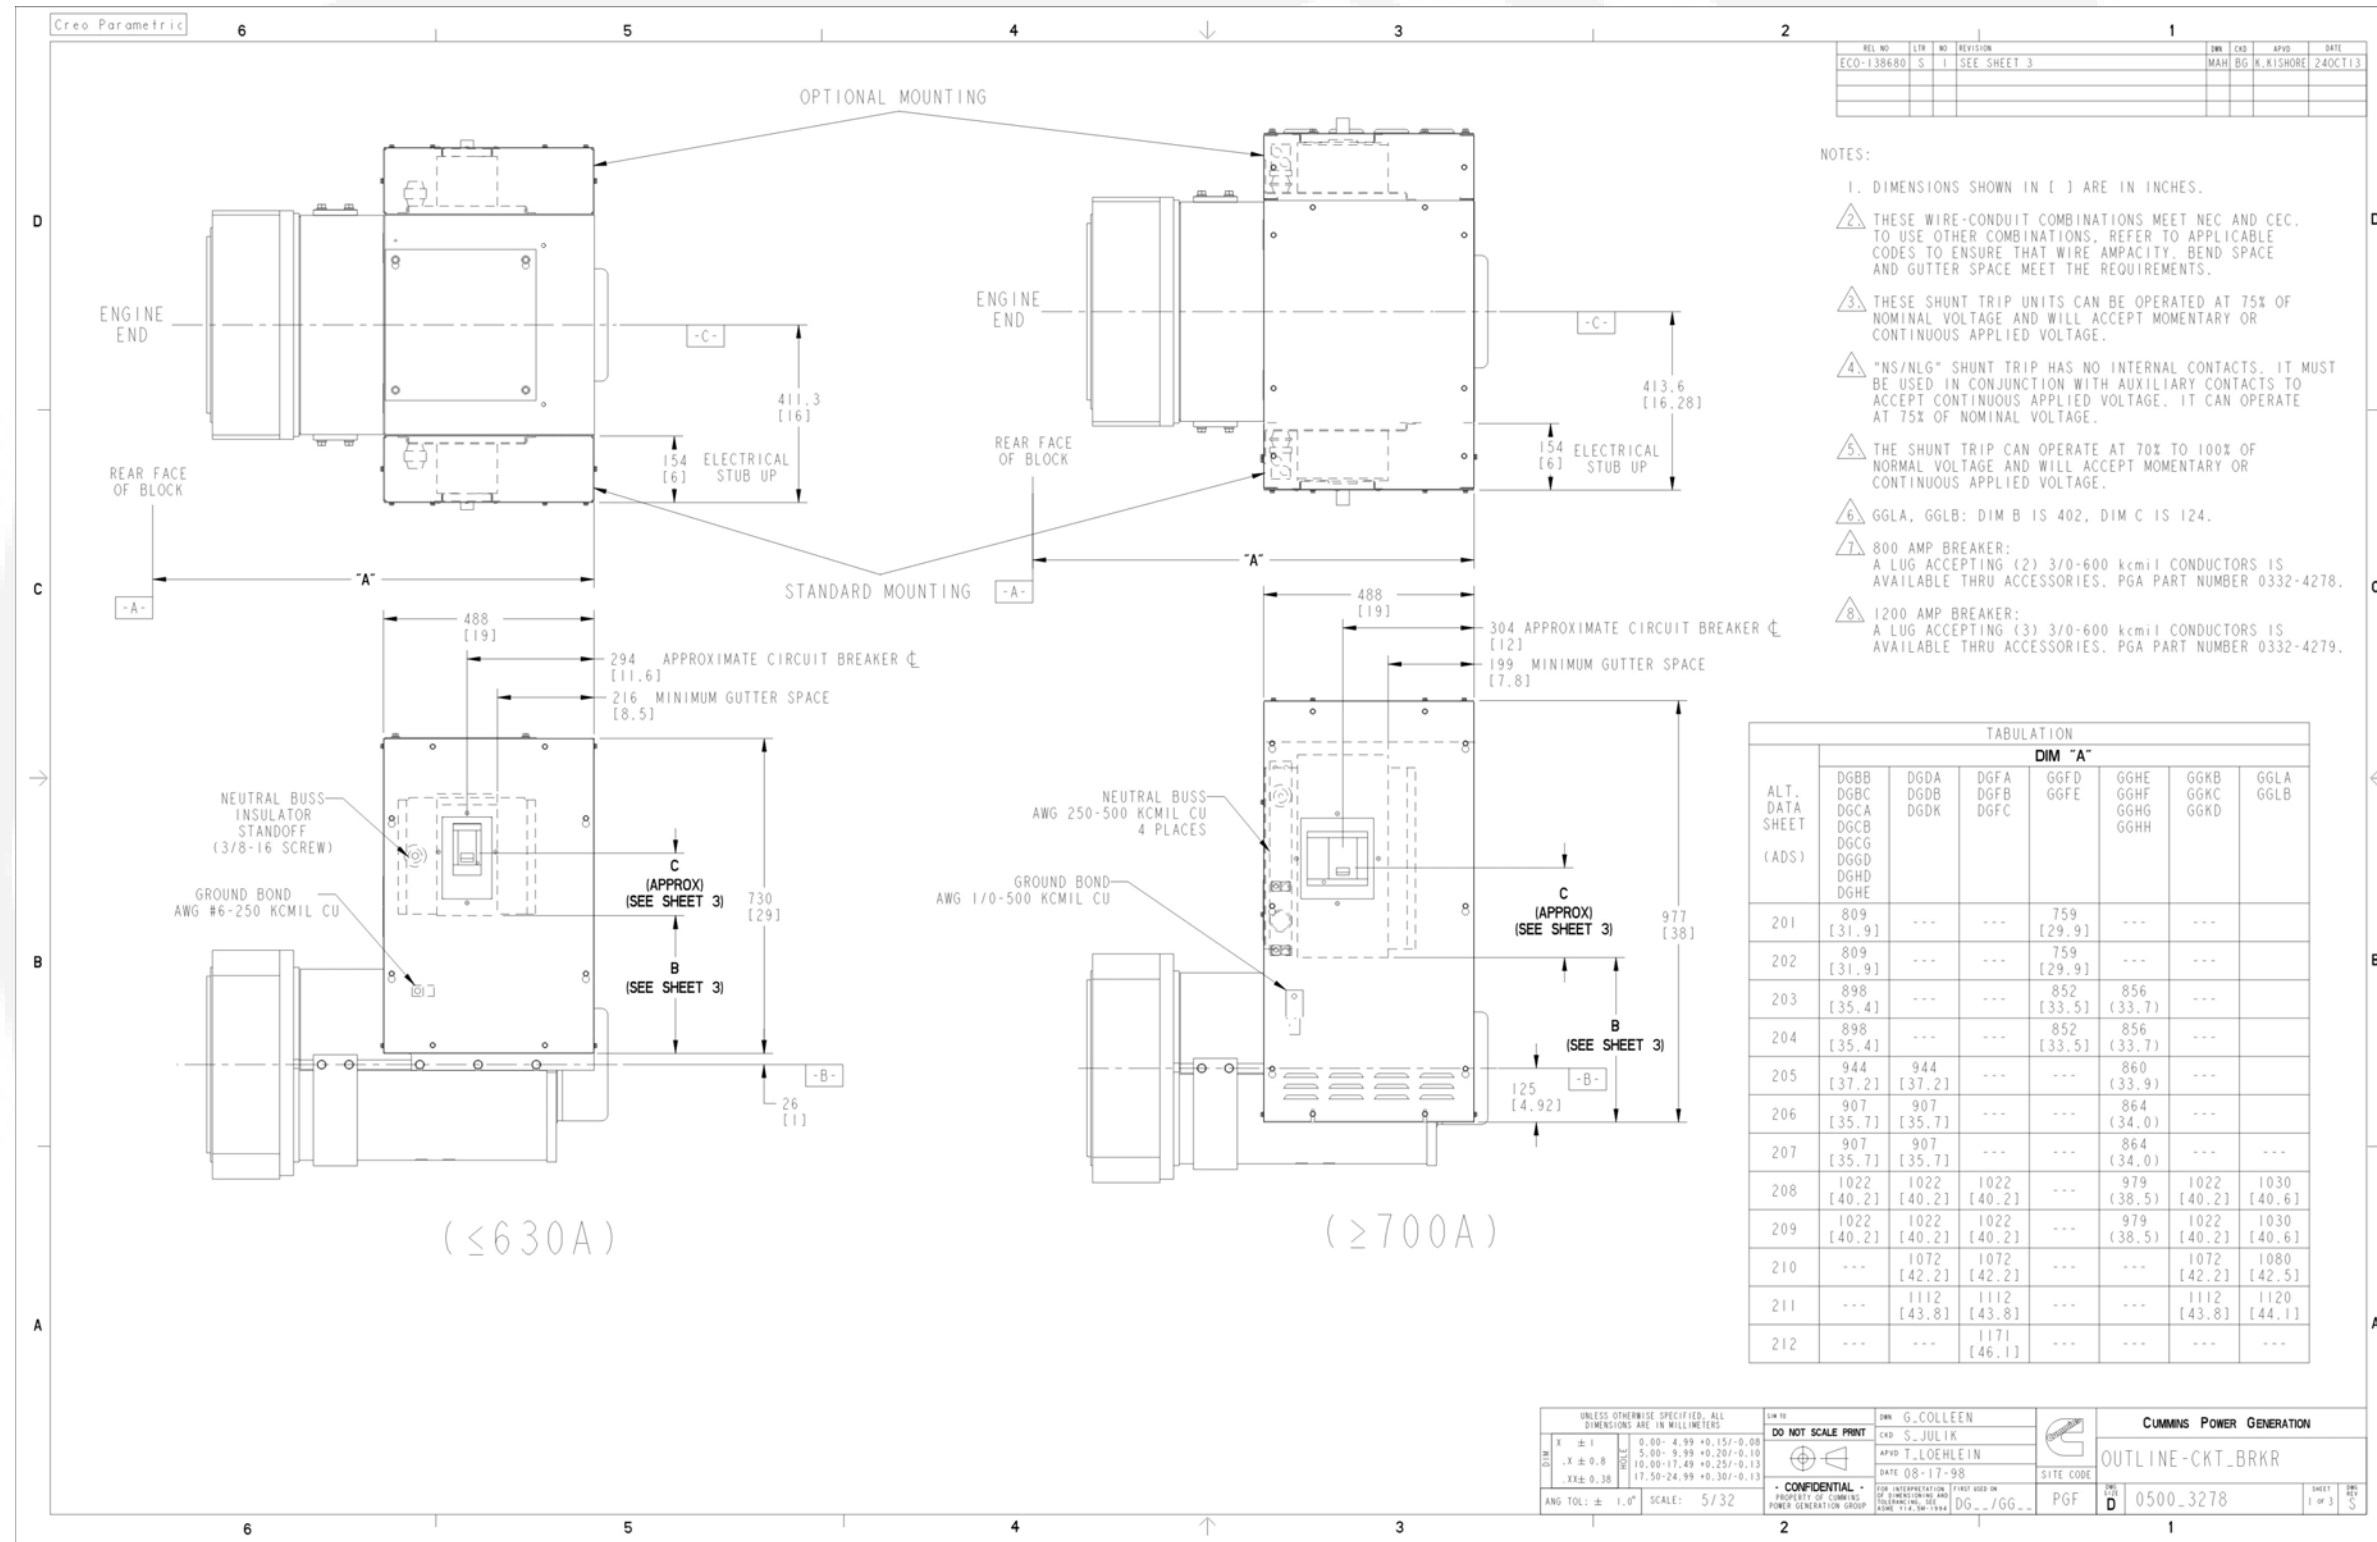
OUTLINE CIRCUIT BREAKER (0500-3278 SHEET 1)
